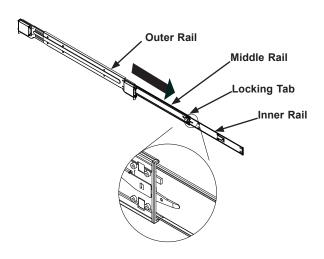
Identifying the Outer Rail, Middle Rail and Inner Rail (Left Rail Assembly Shown)
